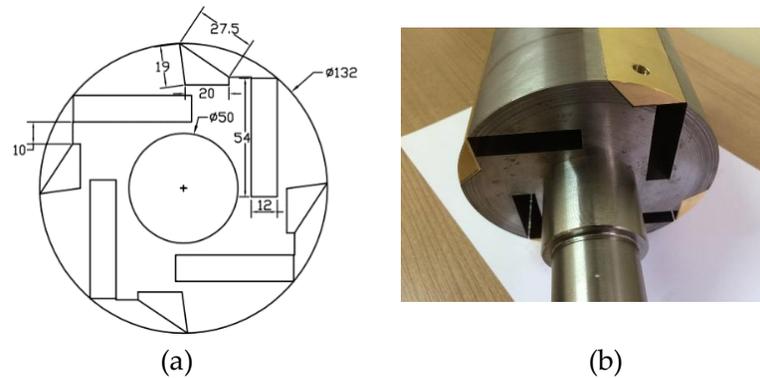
Rotor with embedded magnets – (a) Schematic drawing – (b) rotor assembled [12]
